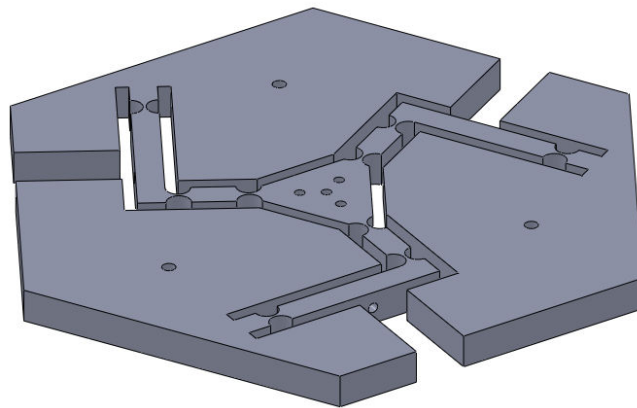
3D appearance of 3-RRR compliant mechanism.
